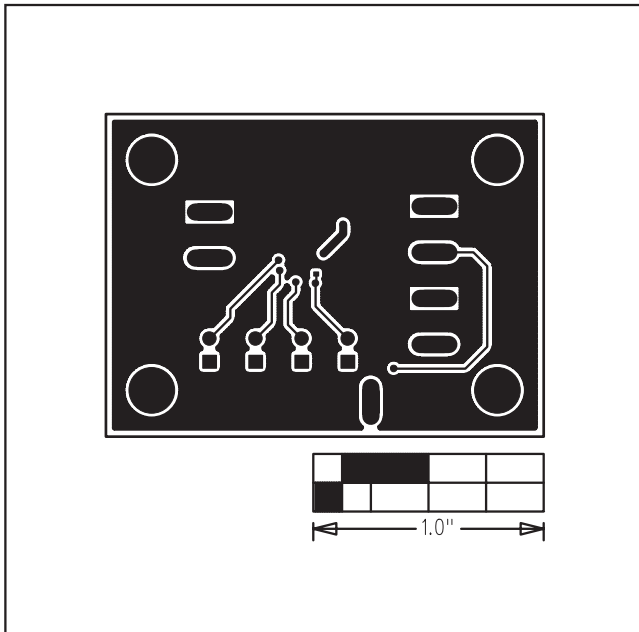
MAX8633 EV Kit PC Board Layout—Solder Side
